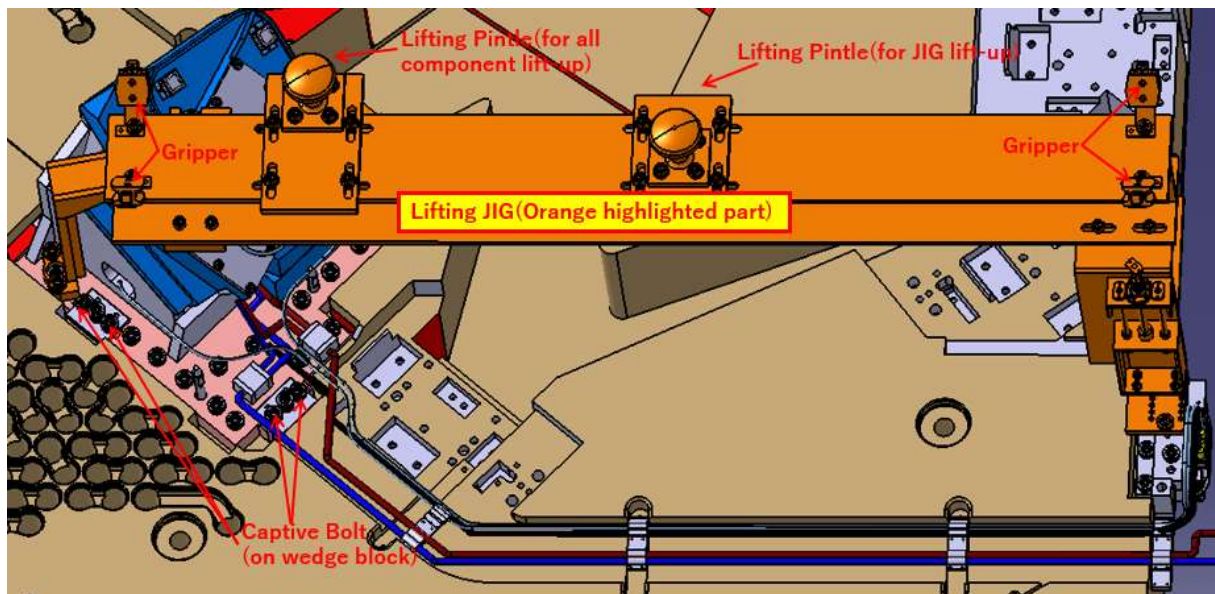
Outlines for the wedge block captive bolts screw tightening for half torque.
